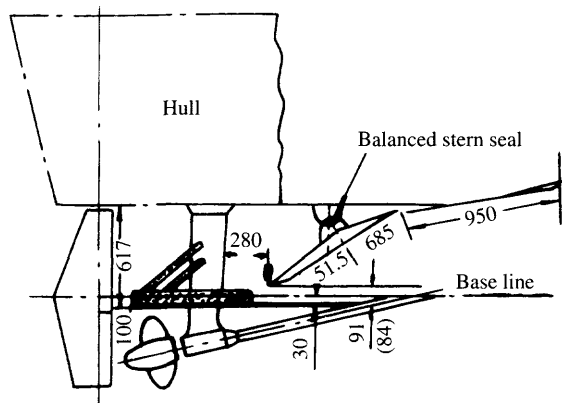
The balanced rigid stern seal on Chinese passenger SES 713.
